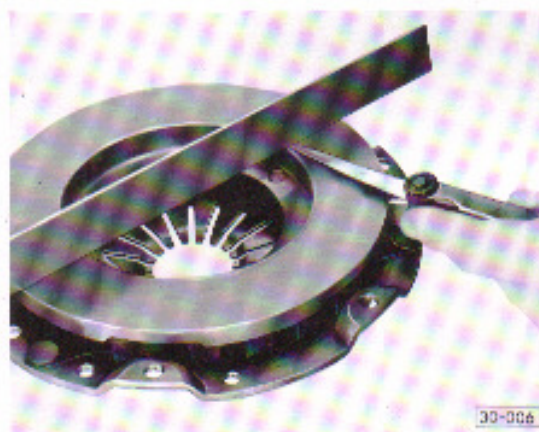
Checking the pressure plate surface for cracks, signs of burning and wear
